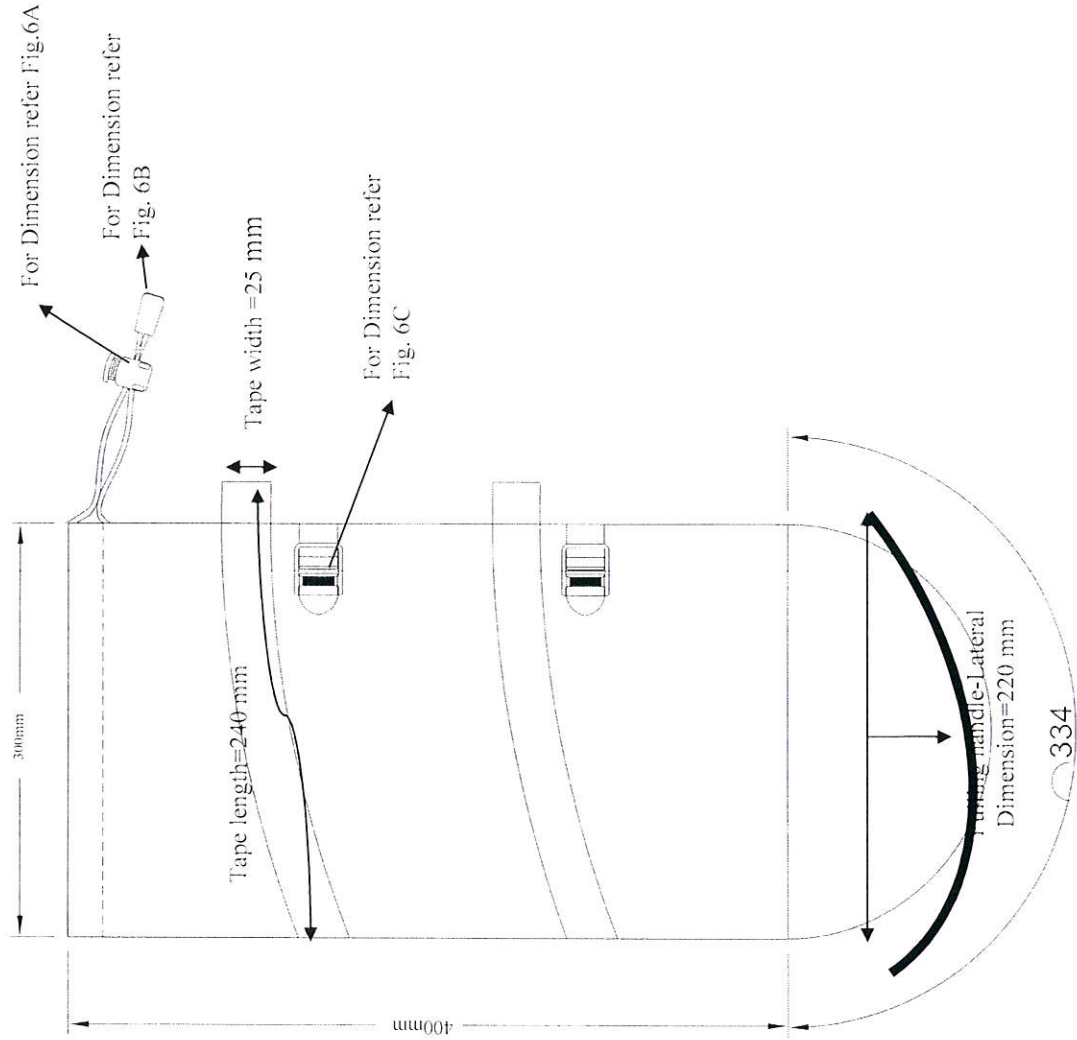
Dimension of a Packing Bag for guidance (All dimensions are in mm)
